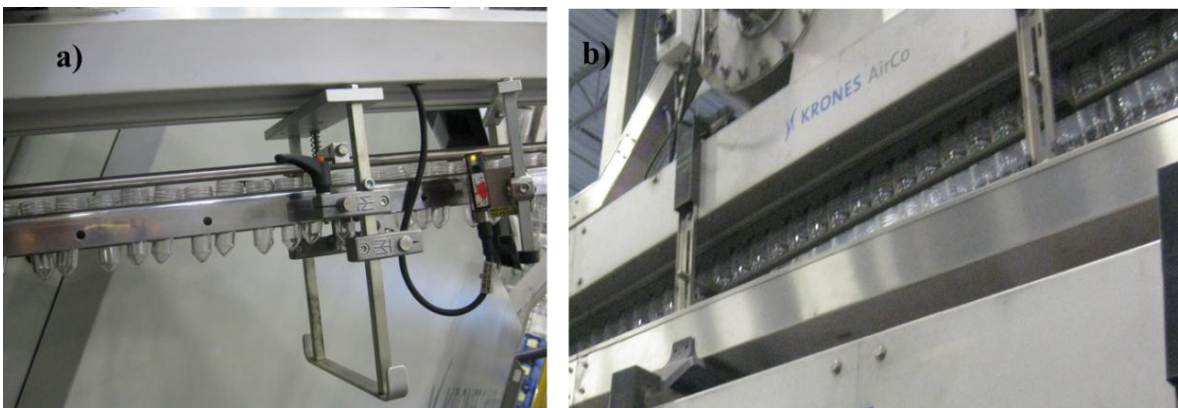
a) Preforms passing through conveyor to the blow molding machine b) Bottles passing through air conveyor towards filling stations.
